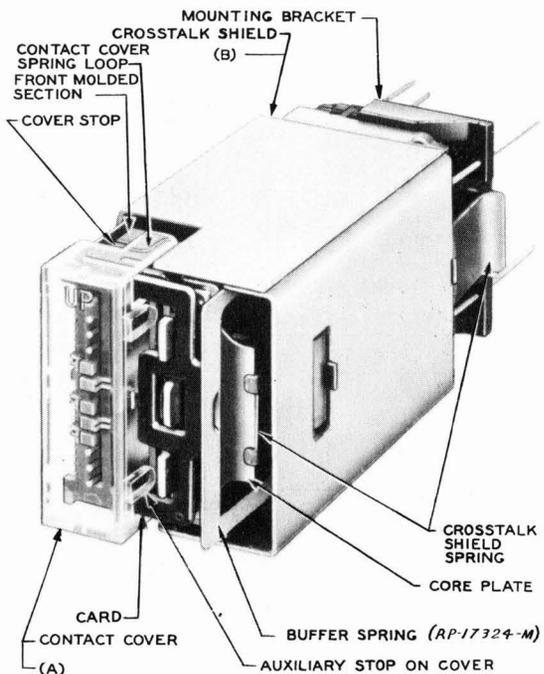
AJ TYPE RELAY EQUIPPED WITH CROSSTALK SHIELD
